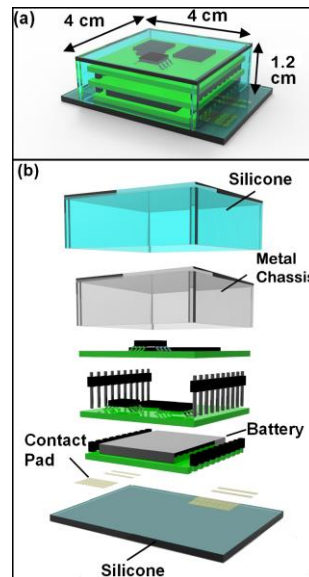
Proposed wearable sleep sensor device electronics module. Shown in (a) assembled view and (b) exploded view.
